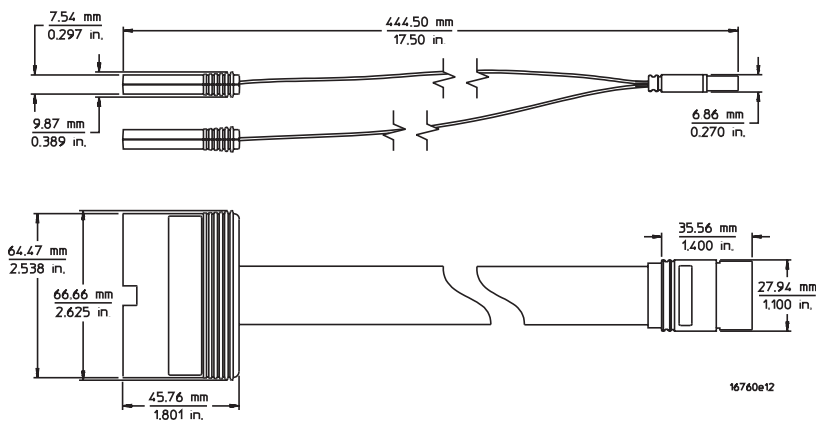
E5378A 100-pin single-ended probe dimensions
